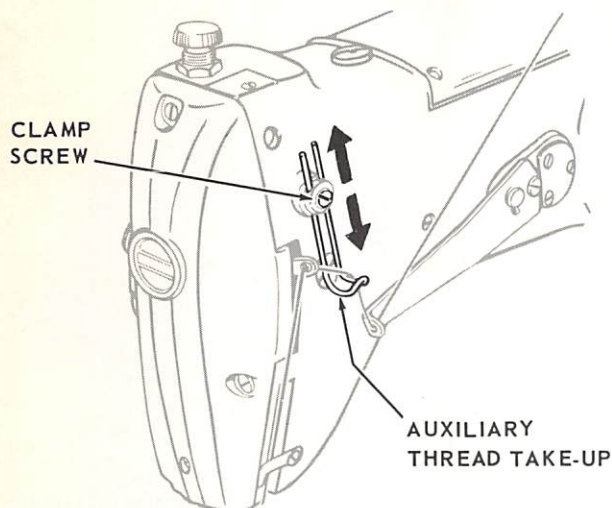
Adjusting the Auxiliary Thread Take-Up
